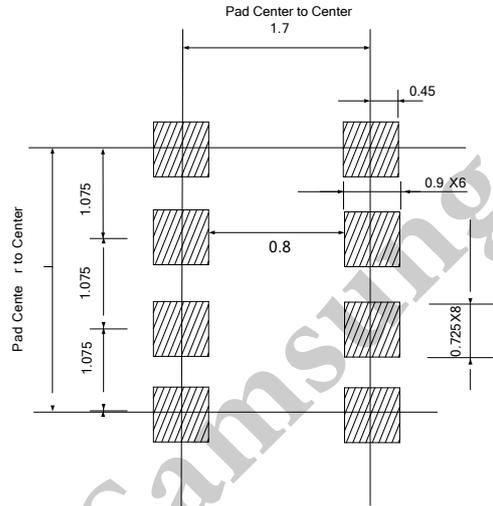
CM36652M3OE-H1-H6 PCB Layout Footprint
